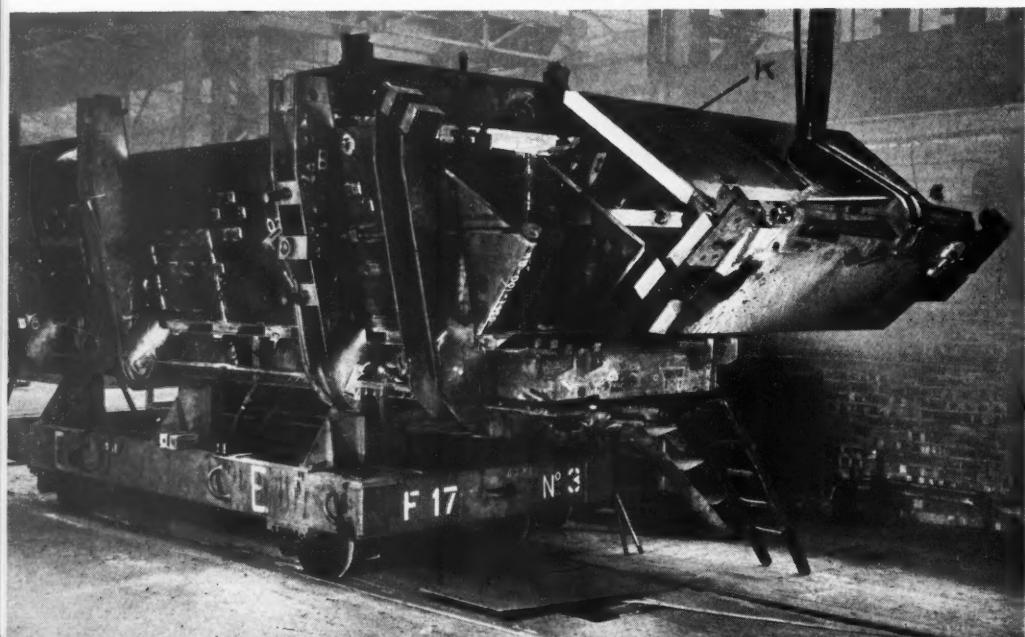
Bogie welding jig for the tank hull runs on a railway track. Nose-armor sub-assembly (K) is shown being moved into position
